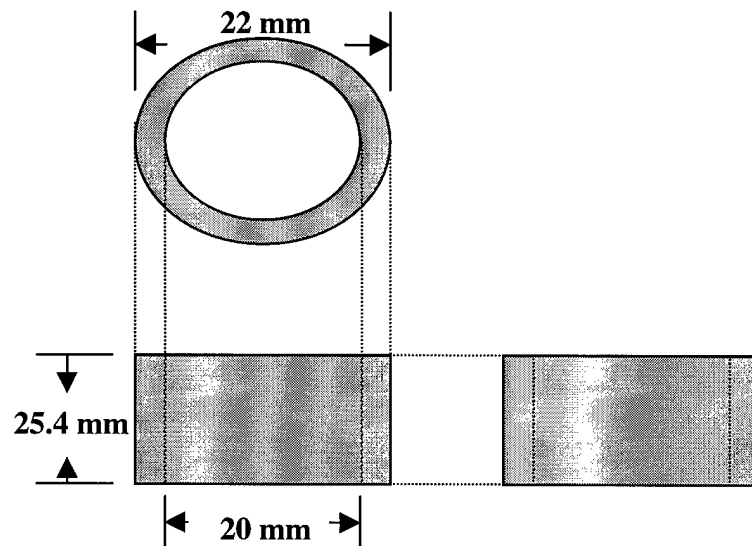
Thin cortical shell design. The 1100 alloy aluminum is also used for this shell.
